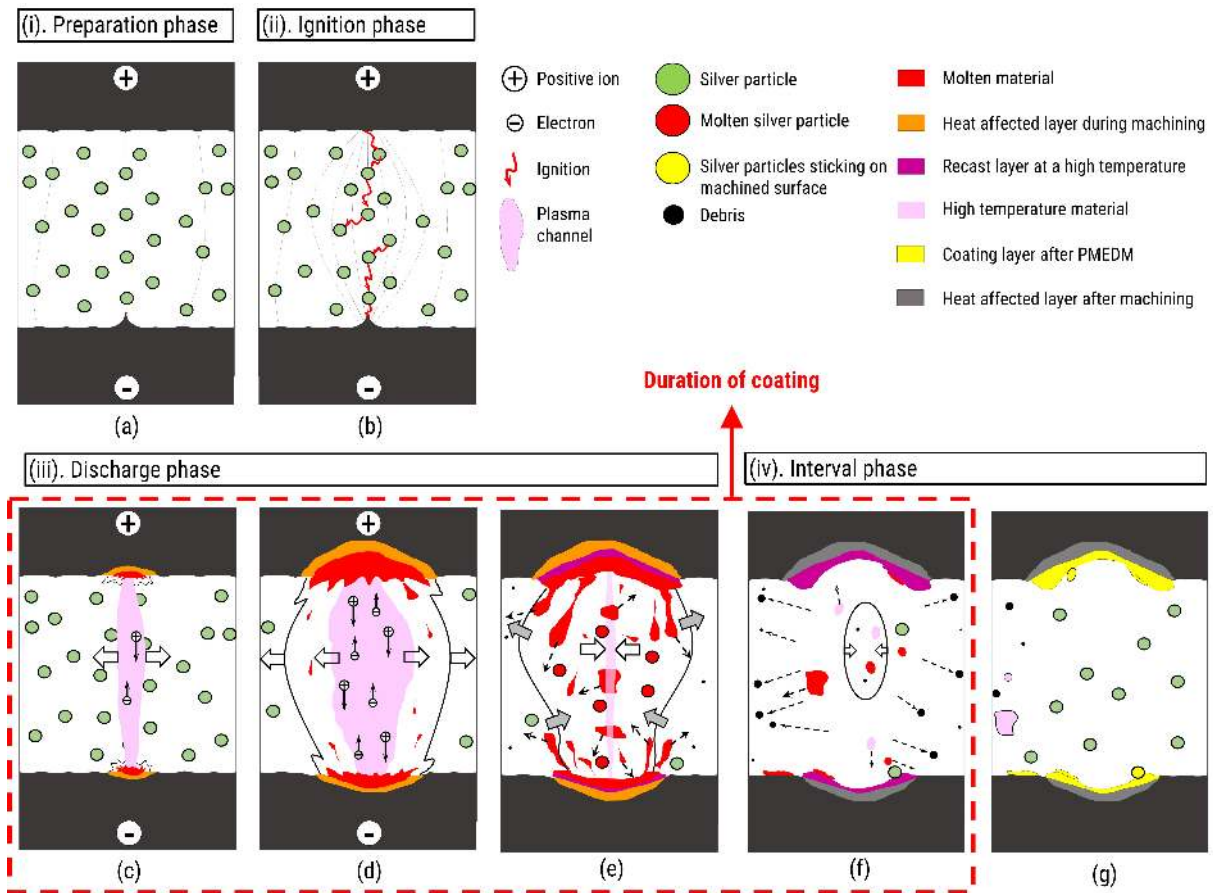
PMEDM's machining and coating mechanism of a single spark. Stages (c-f) represent the duration of the concurrent machining and coating process.
